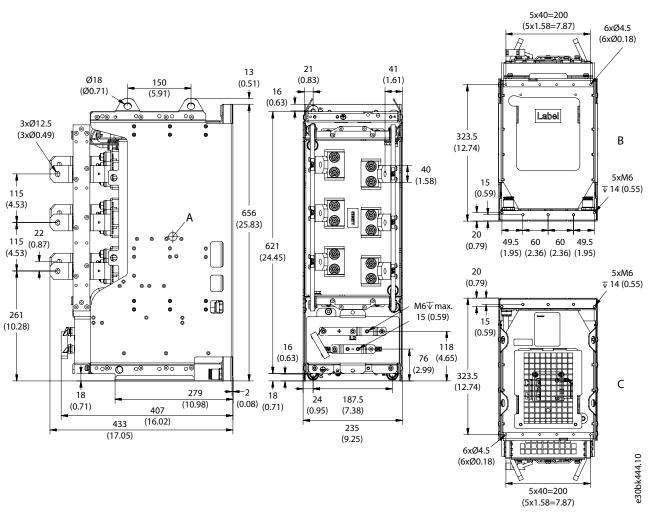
Dimensions of DC Filter DC12L in mm (in)
